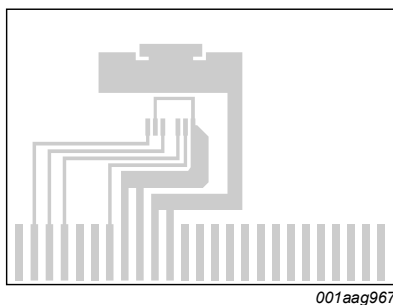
PCB used for thermal tests; heat sink area 200 mm²
